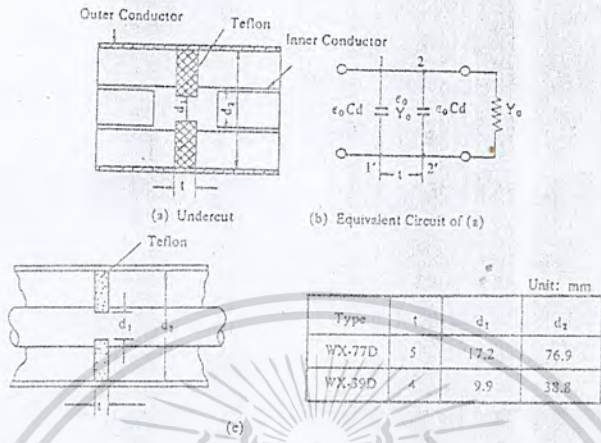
Dimensions of Undercut of Coaxial Transmission Cable
